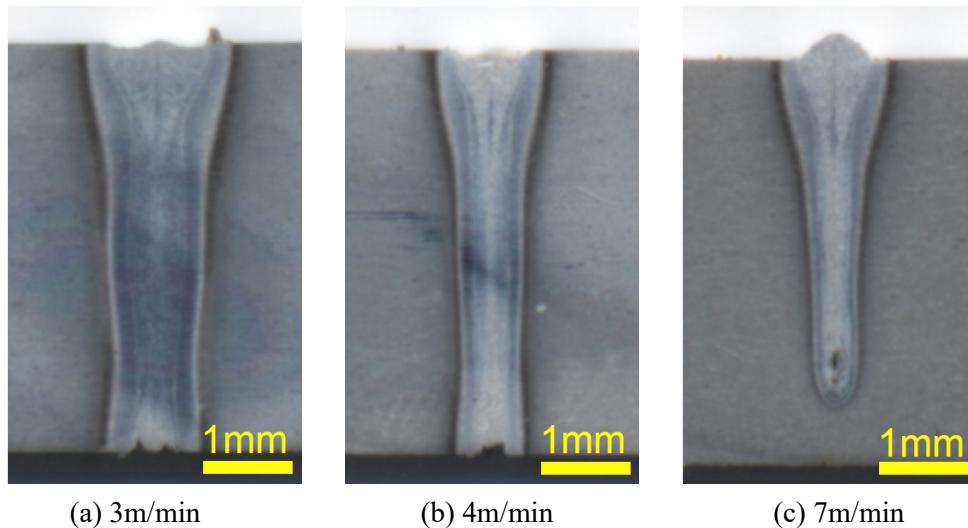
Cross sectional view of weld bead with varied welding velocities (Thickness : 4mm)
